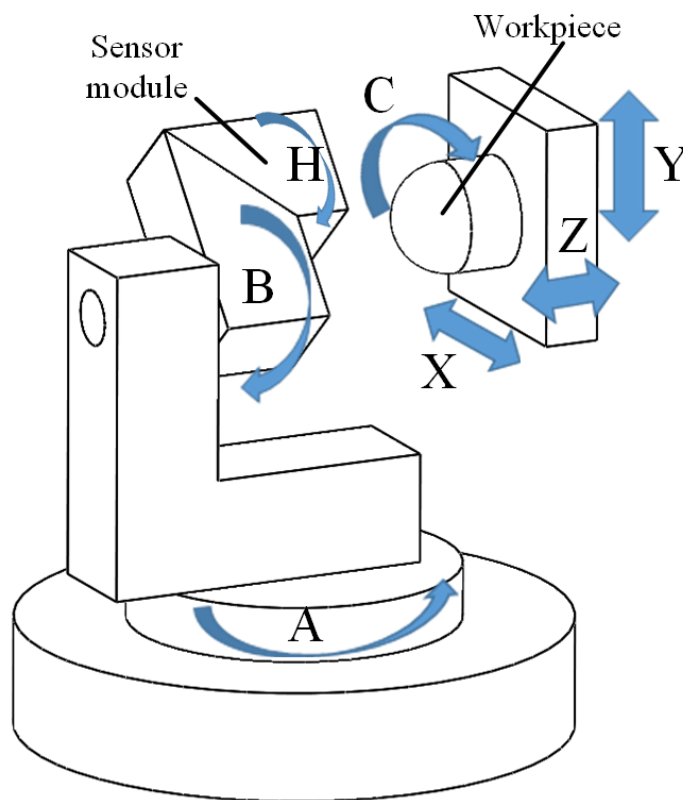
Motion axes setup of the MIM system mounted on the multi-axis ultra-precision polishing machine. The sensor module is mounted on the B axis covering H axis while the workpiece is mounted on the C axis.
